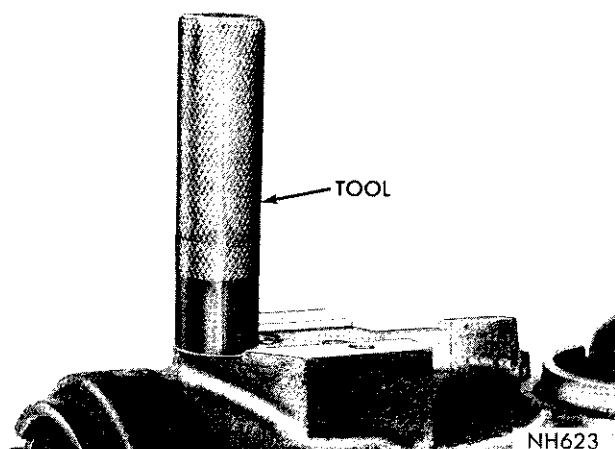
Aligning Center Bearing Spacer with Steering Valve
